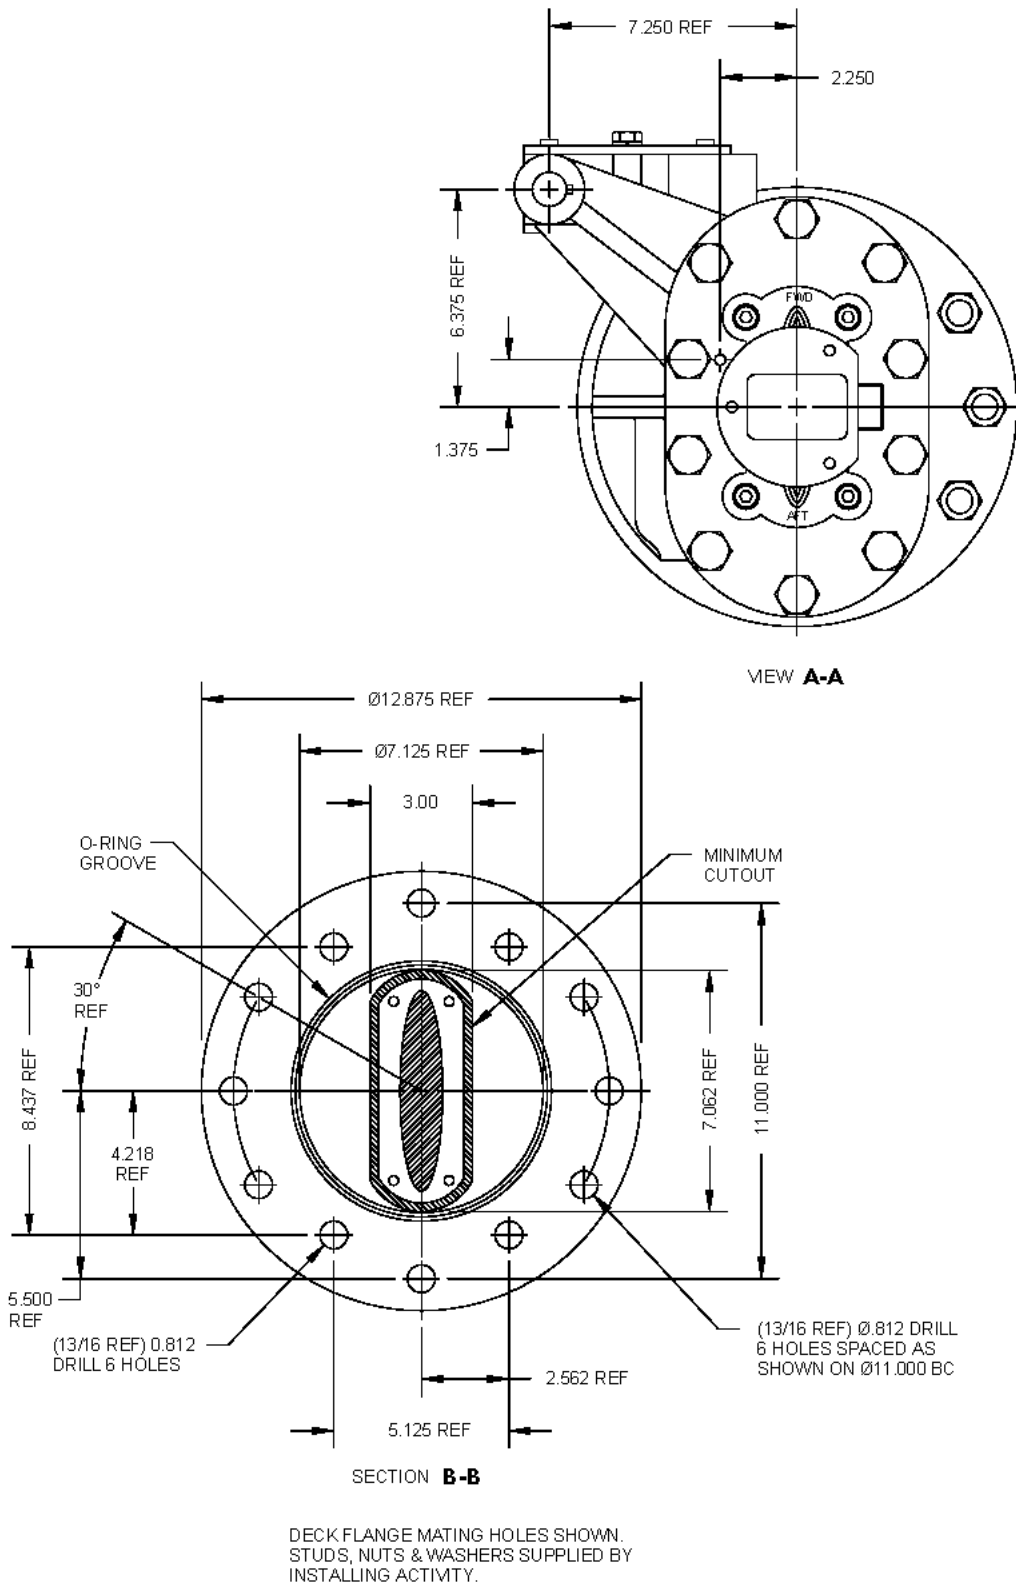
Unit 1 or 6 Rodmeter and Unit 2 or 7 Sea Valve Installation (Sheet 2)
